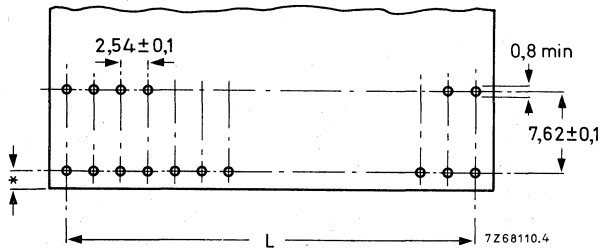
Hole pattern for board edge sockets. See Table 1, pages 8 and 9 for dimension L. The dimension marked * is determined by customer application (min. 2 mm).
